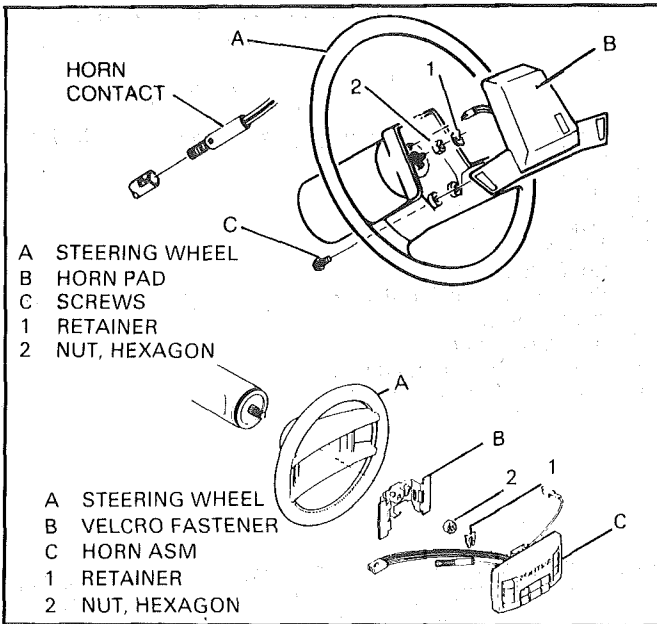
Removing Horn Pad, Retainer, and Jam Nut
